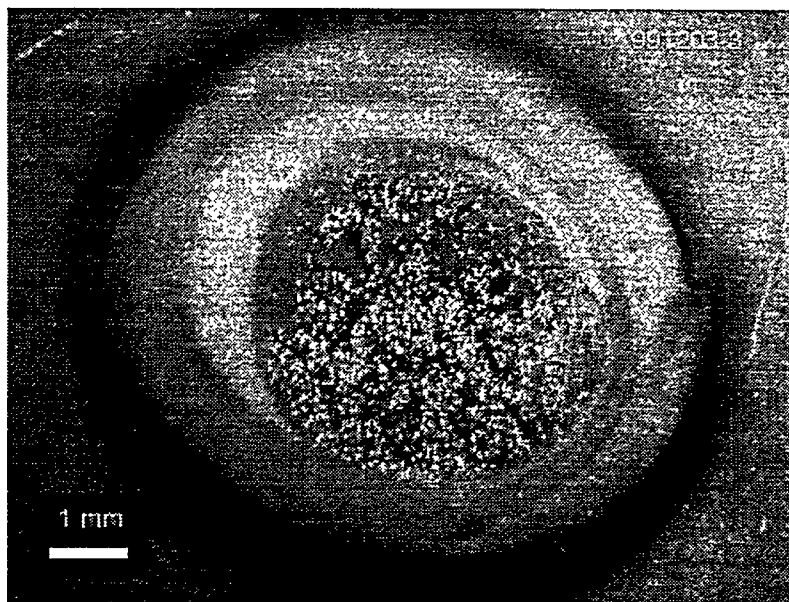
Fractography of the weld (Test No. 991203-3), separated by using a wedge.
